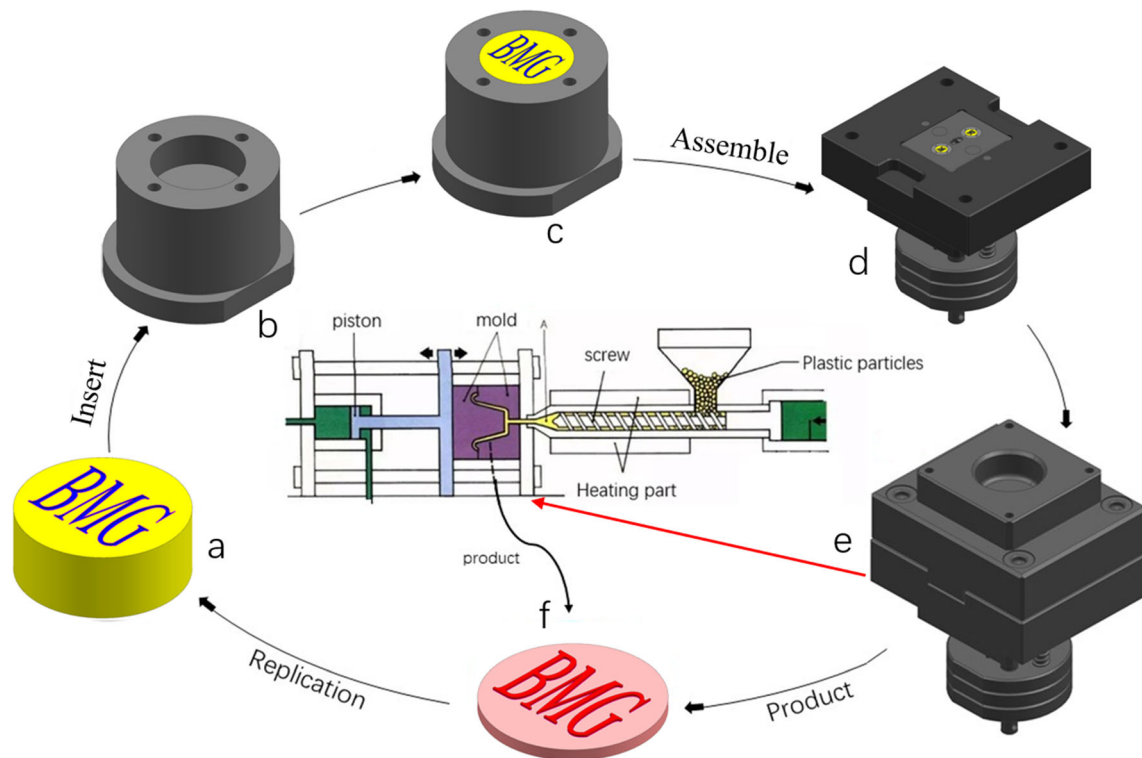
From a to f show the flow chart of the whole set of injection molds design and production process of Babyplast injection molding machine. a is the Zr-based BMG mold insert and f is the injection molded products
